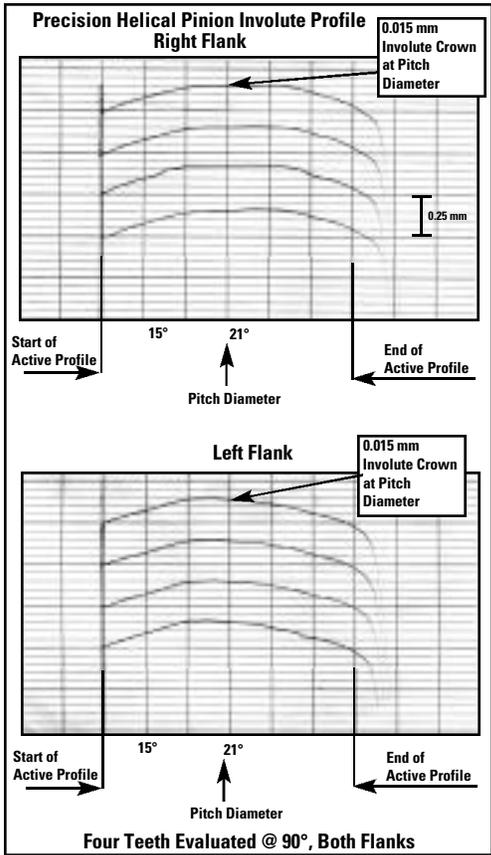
Involute gear traces on rolled densified helical gears taken at 90° intervals on the gears.
